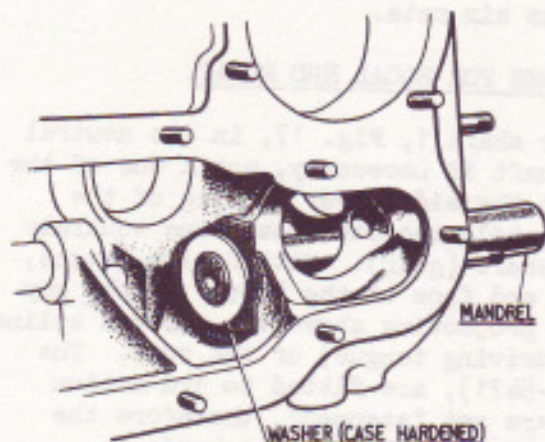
POSITIONING OF REAR WASHER OF 2ND MOTION SHAFT DURING ASSEMBLY.
